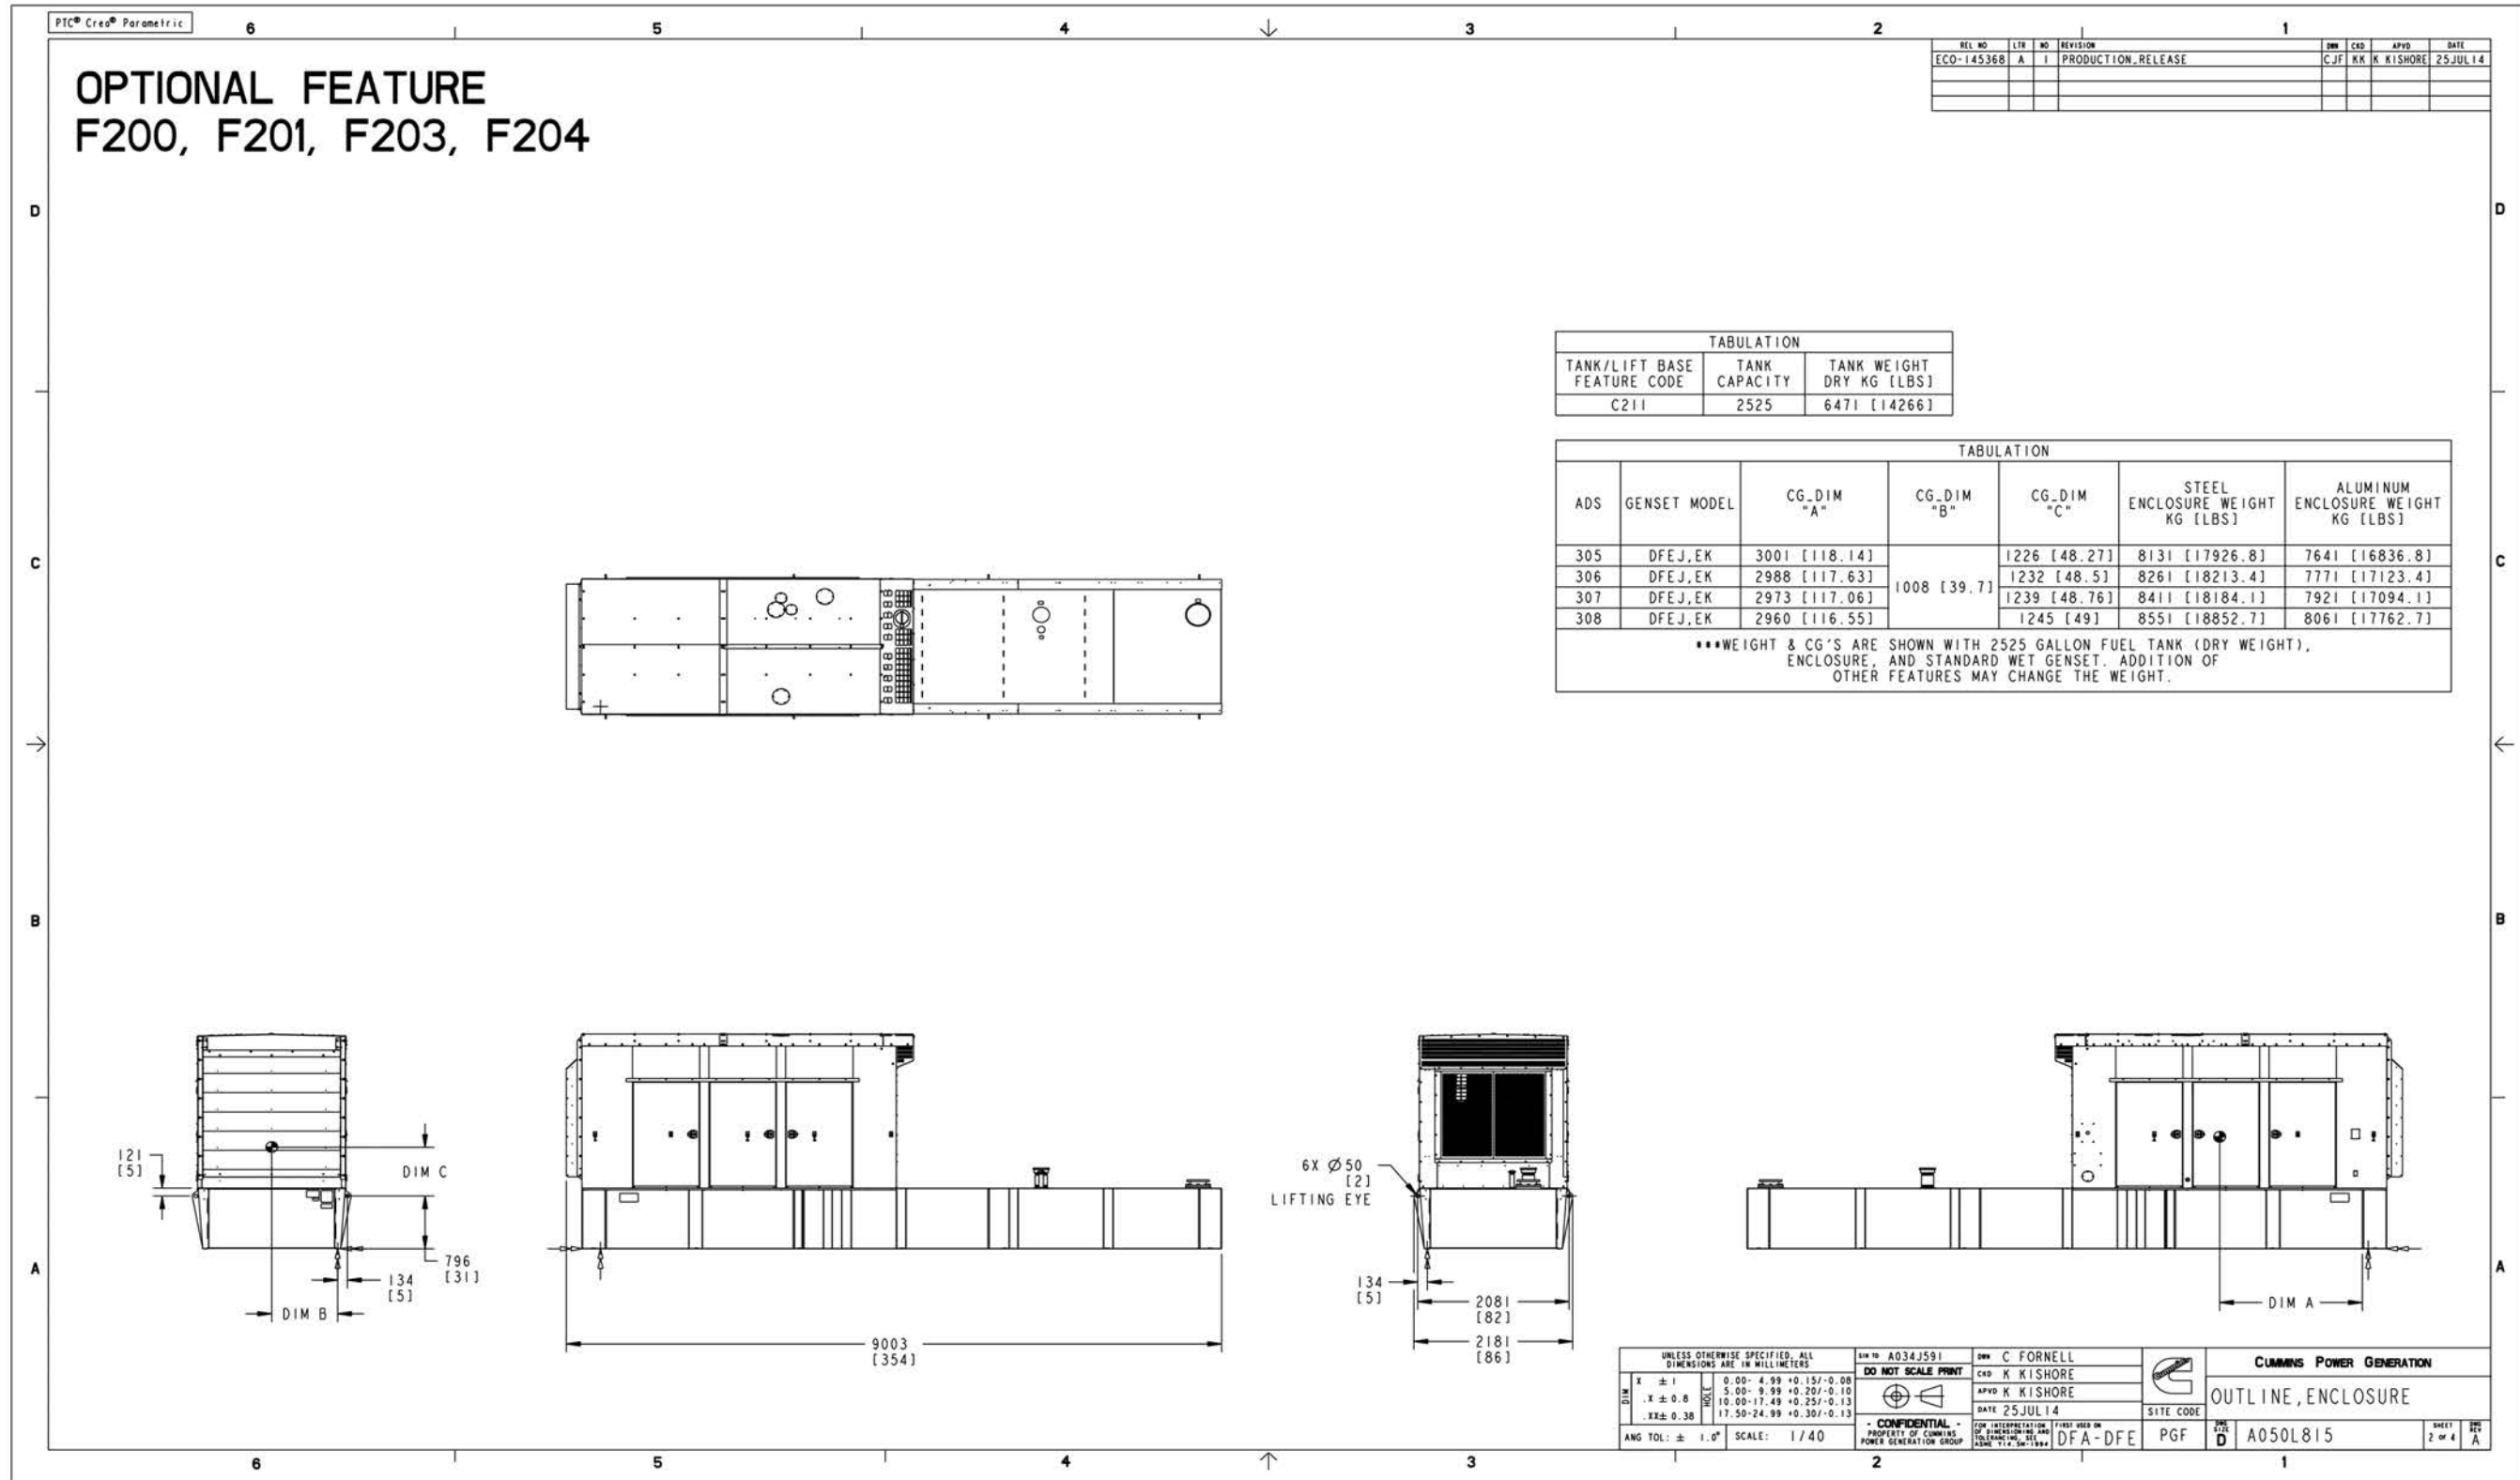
ENCLOSURE OUTLINE DRAWING F200, F201, F203, F204, F206 SHEET 2 OF 4
